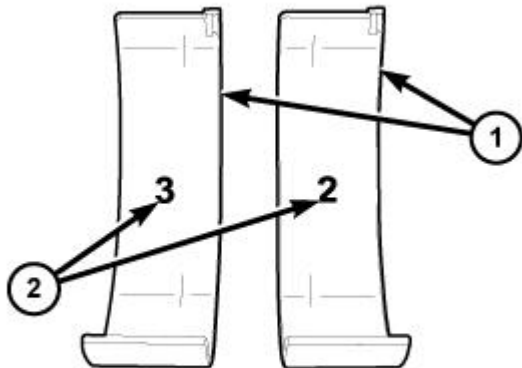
Connecting Rod Bearing Shells & Bearing Size
